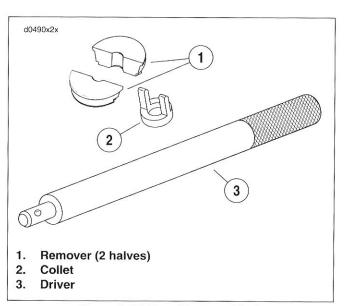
Race Remover Tools (HD-33416 and HD-39301-A)
